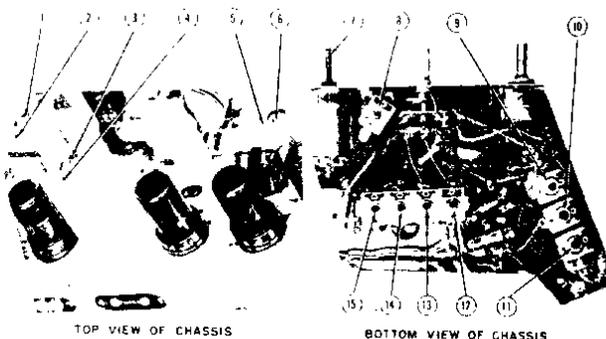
Top and bottom views of the receiver locating slugs, paddars and trimmers for alignment purposes.
